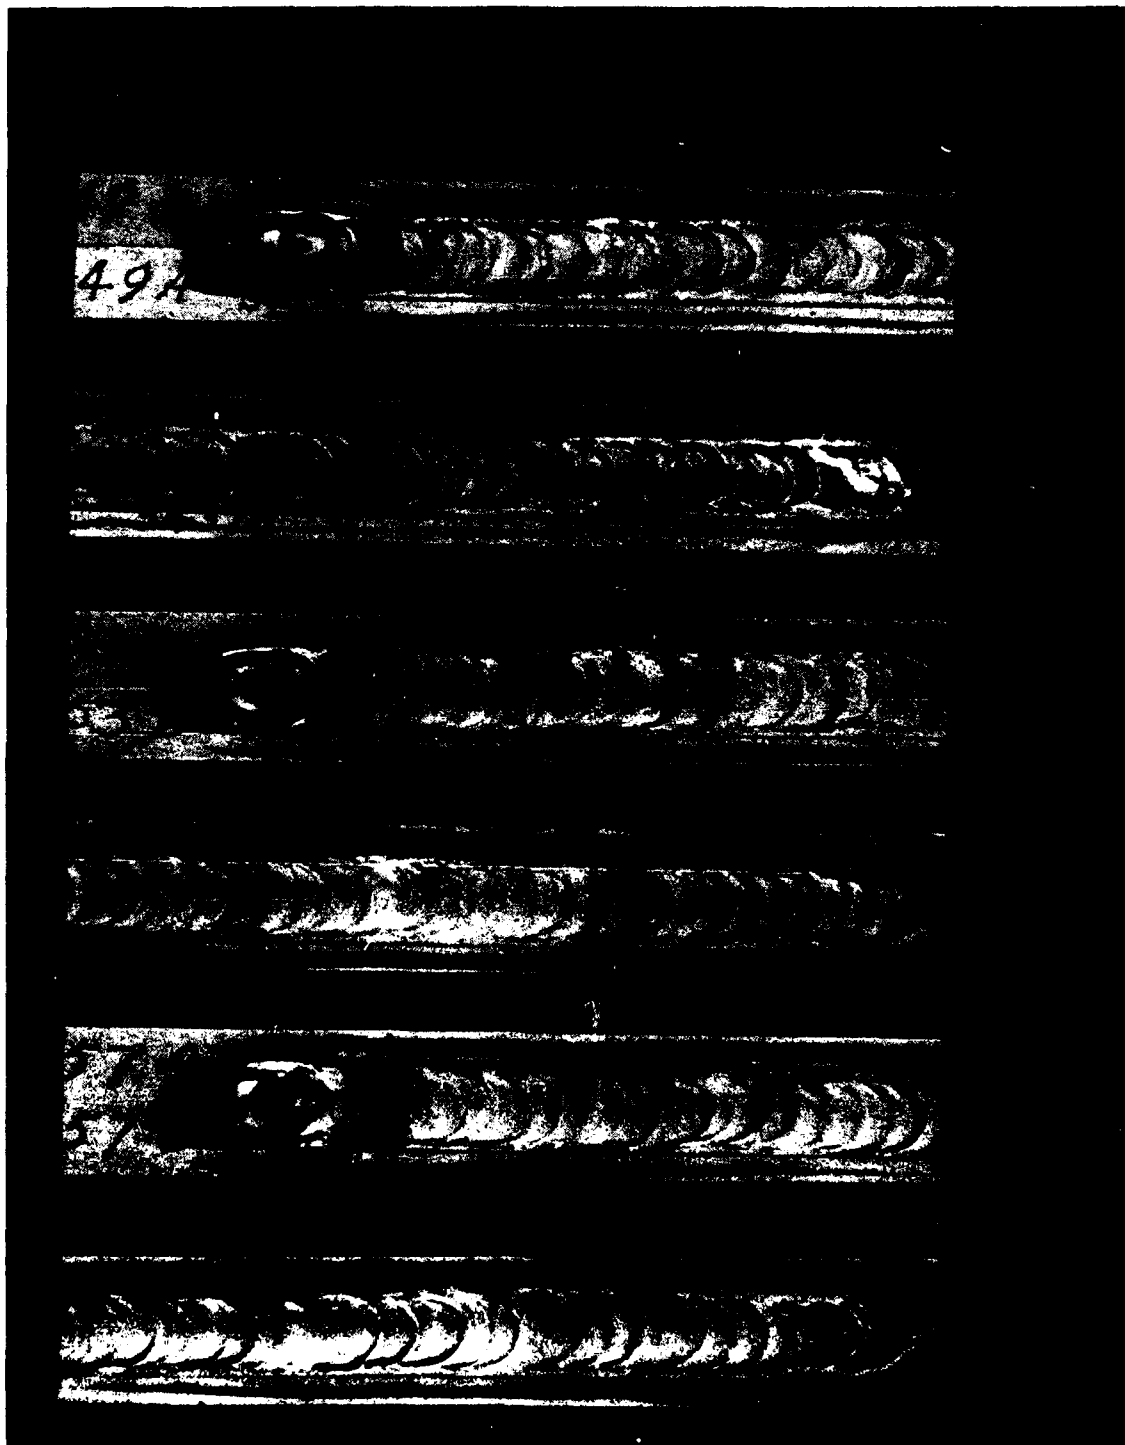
Aluminum Alloy Type 5456 - Specimens: Pretest
